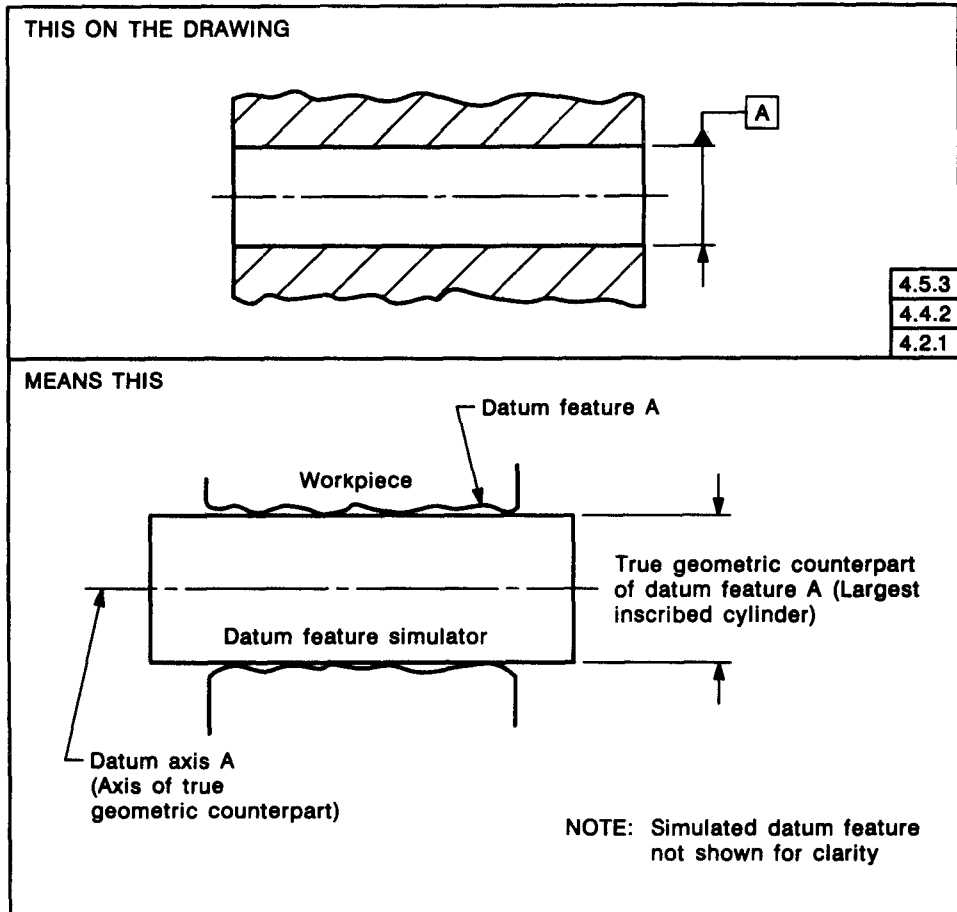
PRIMARY INTERNAL DATUM DIAMETER — RFS
